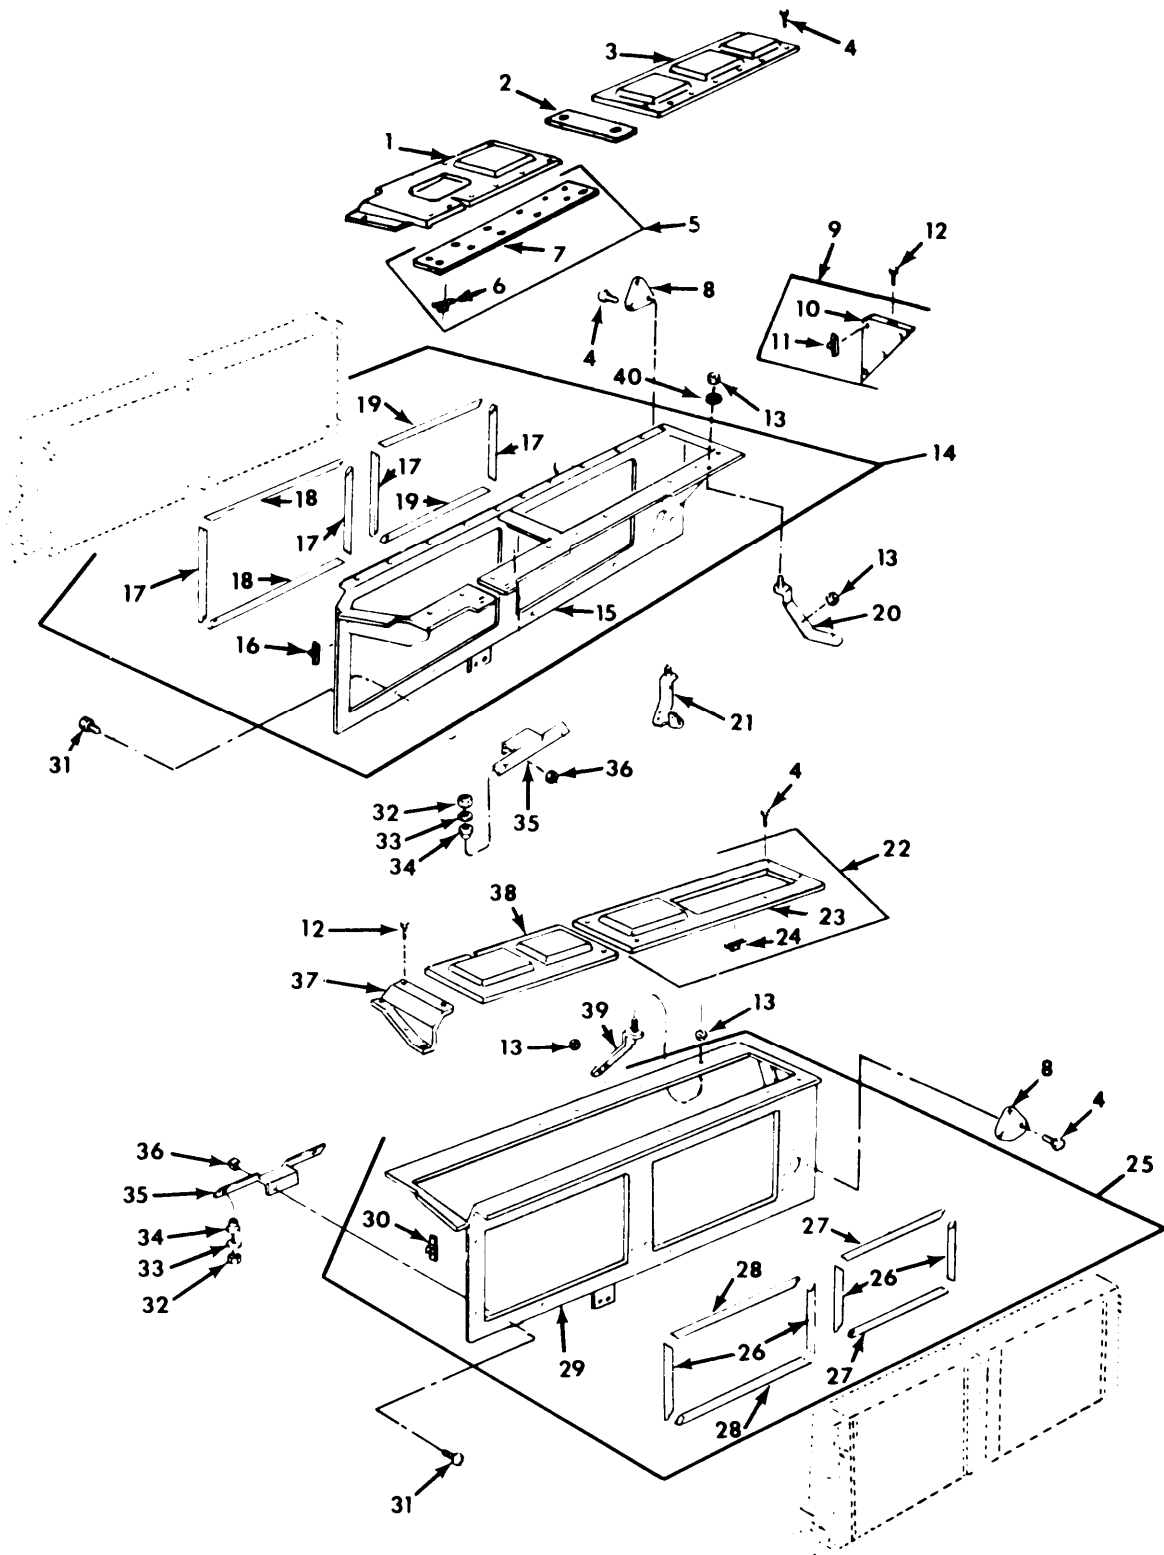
OIL COOLER FRAMES, SHROUDS, AND RELATED PARTS.
